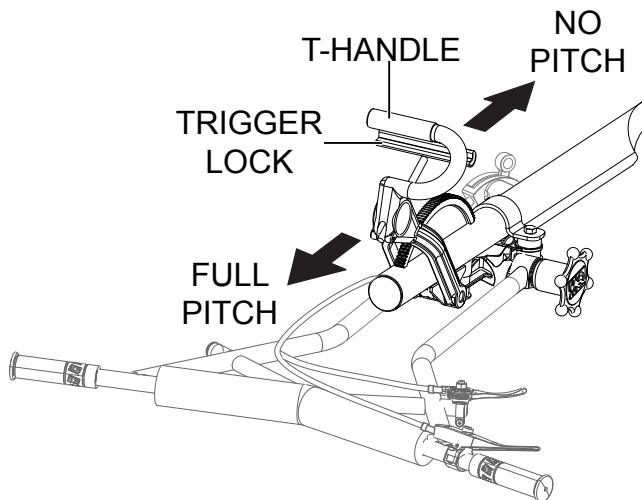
Adjusting Cable Blade Pitch (Quick-Pitch™ Handle)
